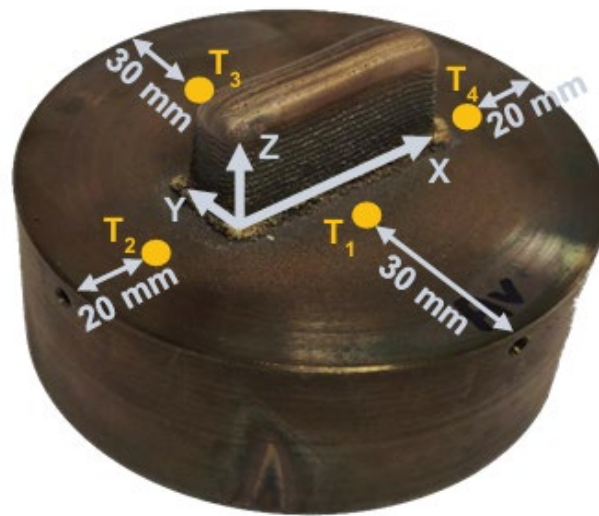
Sample printed with the axis system defined and location of the thermocouples.
